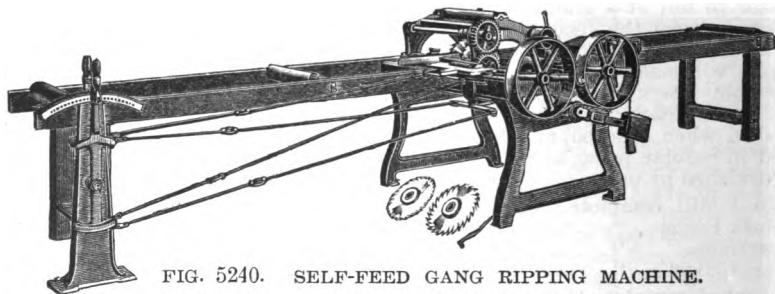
SELF-FEED GANG RIPPING MACHINE.
